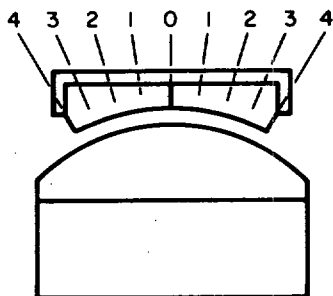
Bearing section for conformity test - Type II, Class 1.
